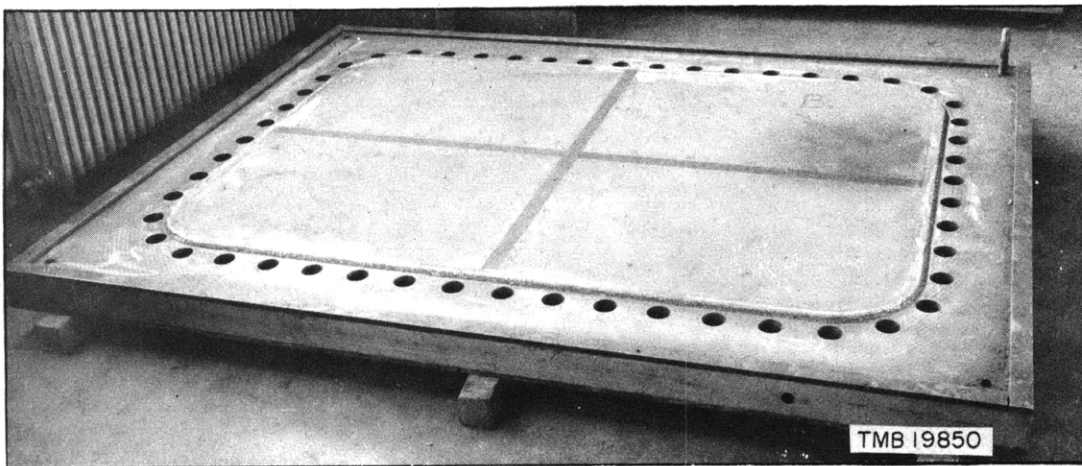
Compression Plate with Diaphragm Welded in Place
